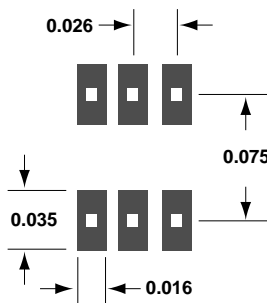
PCB Pad Layout for INA-54063 (dimensions in inches).
